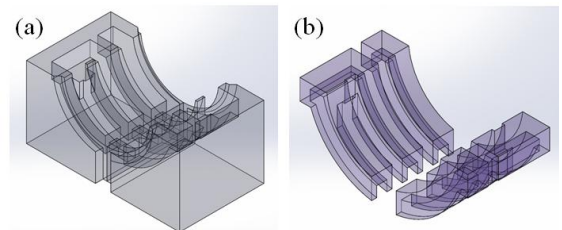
Design of test mold core to check the possibilities of curved cooling channel: (a) Machined test mold core and (b) coupons
